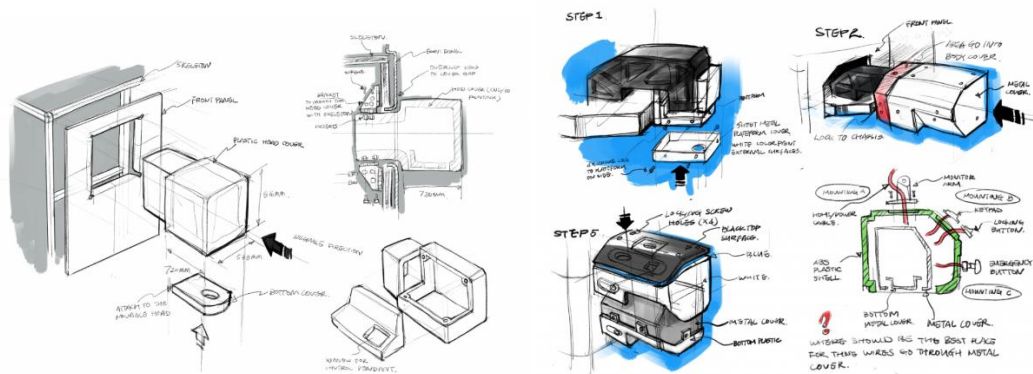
Quick concept sketch and equipment enclosure instructions [1]
